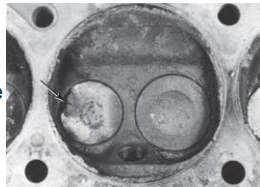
Badly burned exhaust valve. A compression test could have detected a problem, and a cylinder leakage test (leak-down test) could have been used to determine the exact problem.
